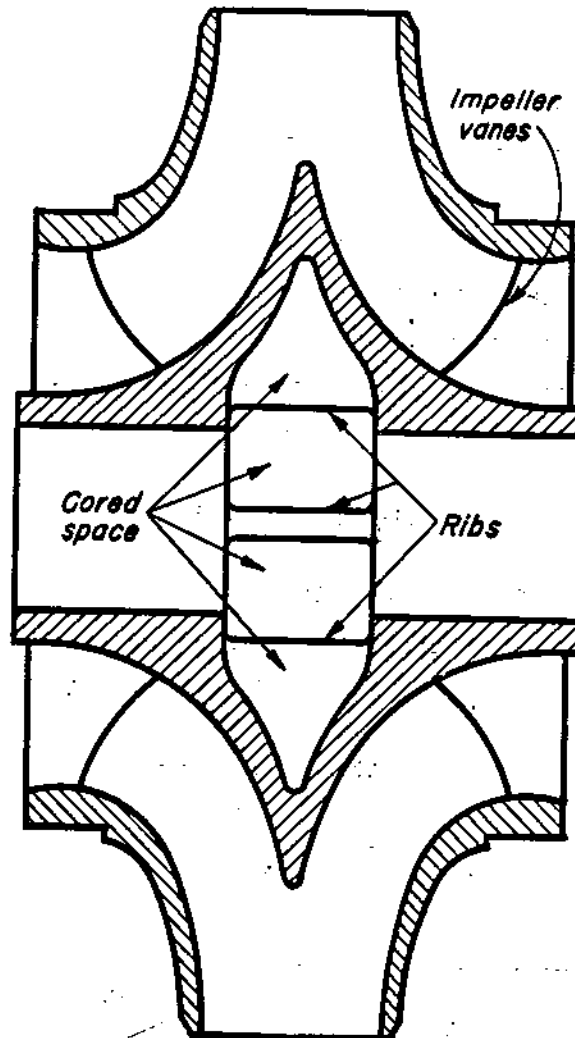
Section of double-suction impeller showing cored-hub construction commonly used.
